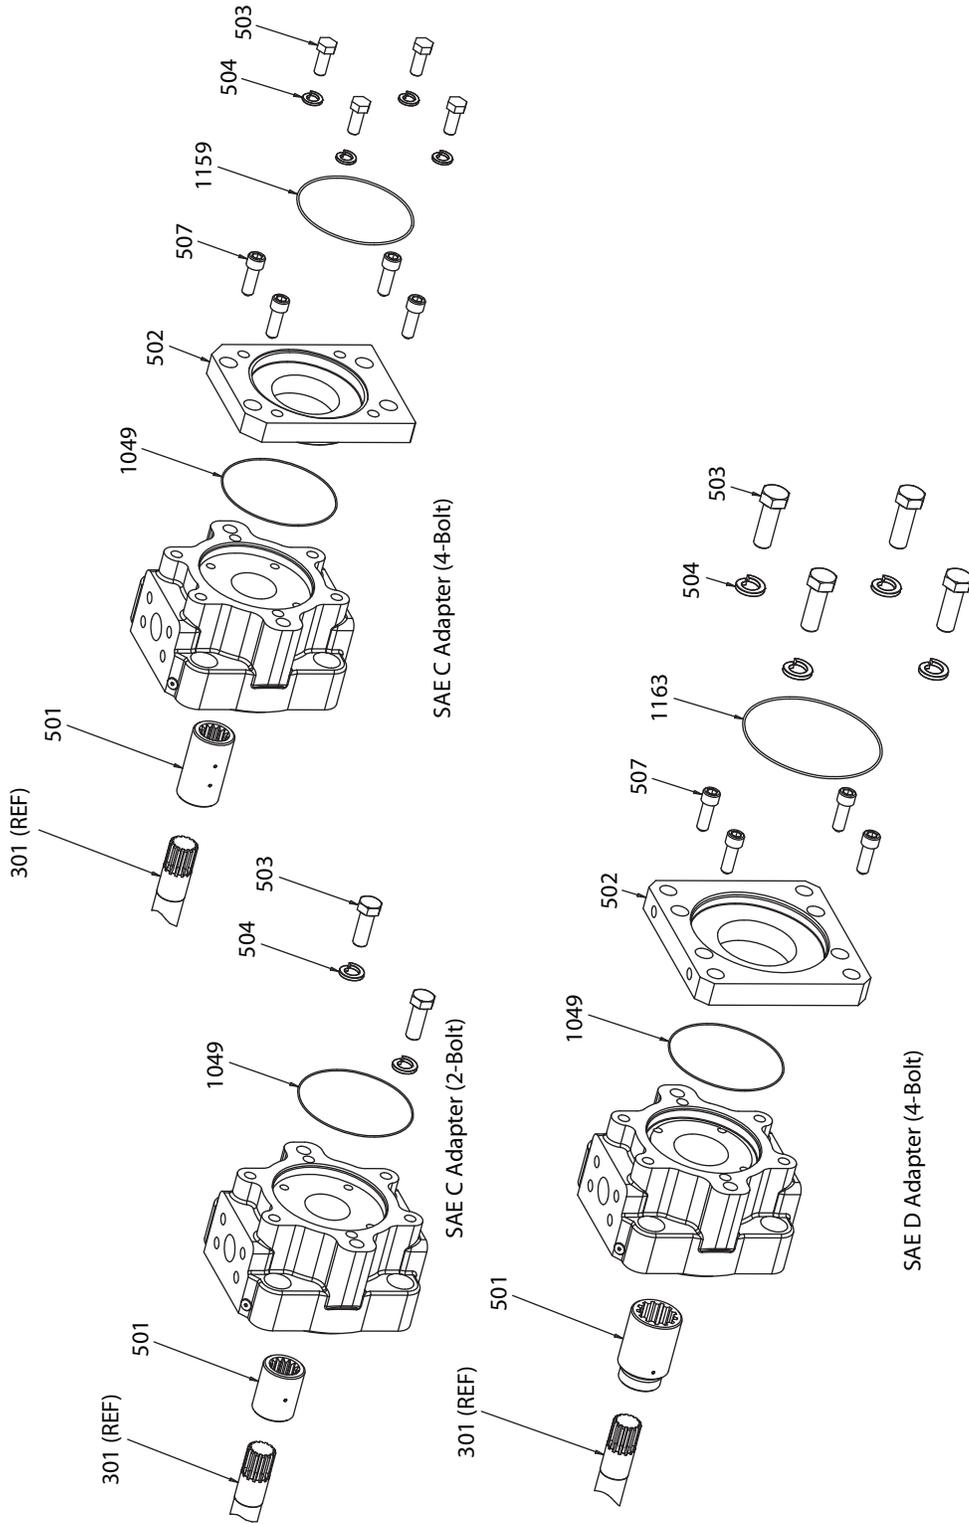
Cross Section and Exploded Parts Drawing for PVG 150 (520147-201 sheet 4 of 5)
